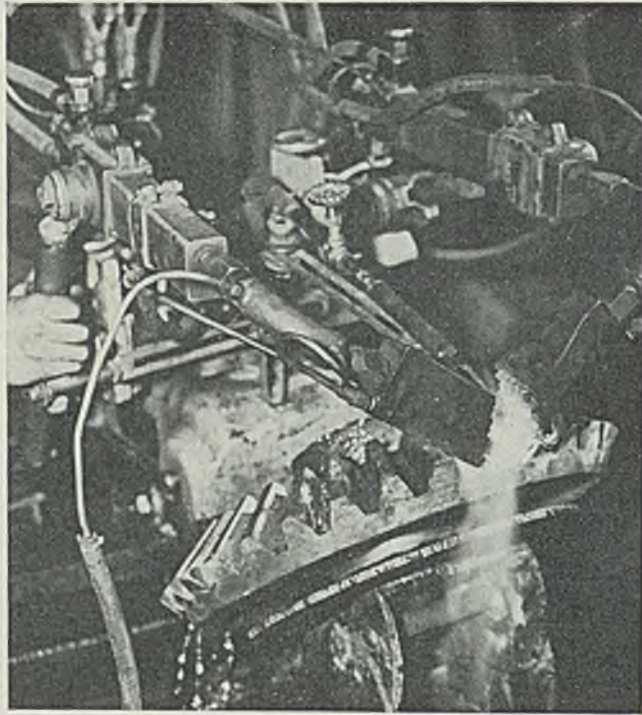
General setup for machine hardening gear teeth by means of the oxyacetylene flame
